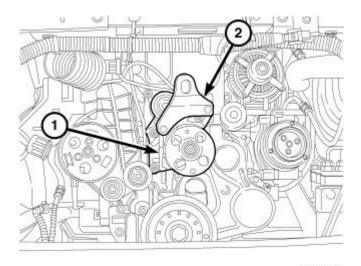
Accessory Pulley & Engine Lifting Bracket
